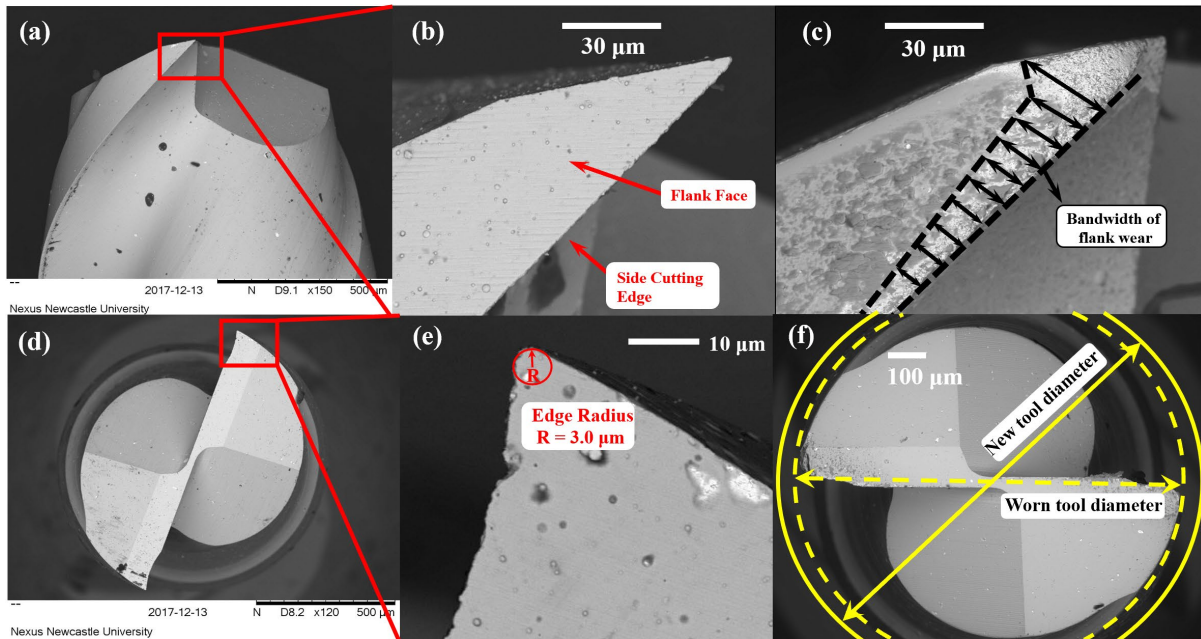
SEM results of cutting tools. (a) Side view of brand-new tool; (b) Flank face of brand new tool; (c) Measurement method of tool flank wear; (d) Top view of brand new tool; (e) Measurement method of tool edge radius; (f) Measurement method of worn tool diameter loss.
